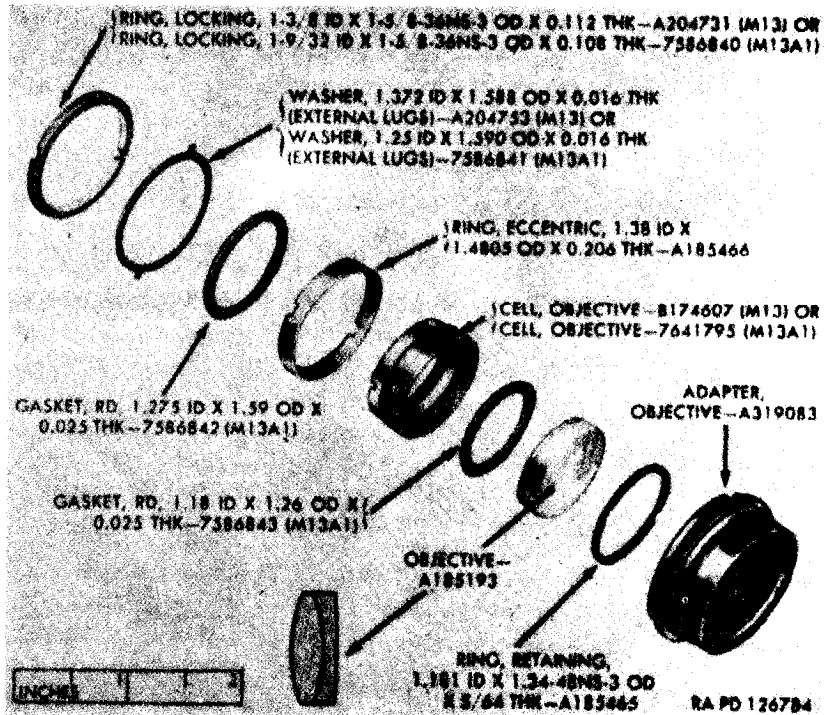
Objective assembly C131334 or 7674286 - exploded view.
